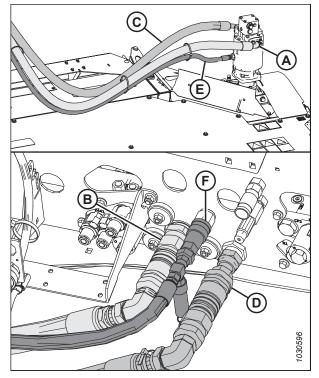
Hydraulics and Electrical – Auger/Rotary Disc/Draper-Ready Configuration
